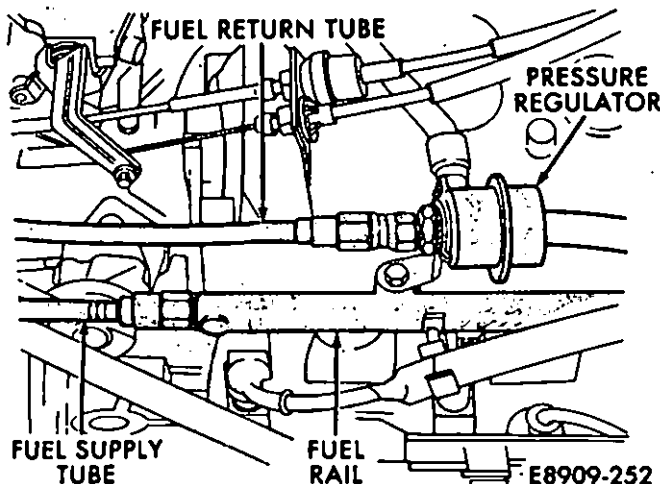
Fuel Tubes/Regulator/Fuel Rail
